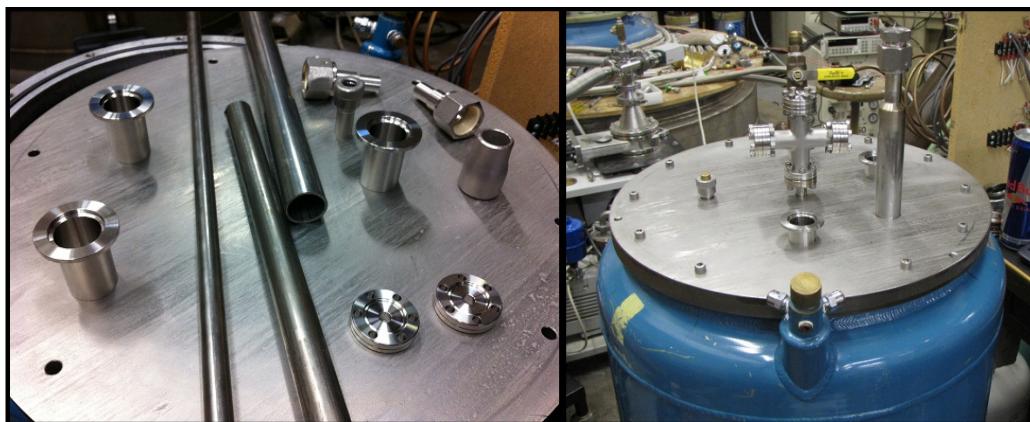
Shown is the initial stainless steel 304L plate before any machining on the left. The final plate with welded fittings is shown on the right.
